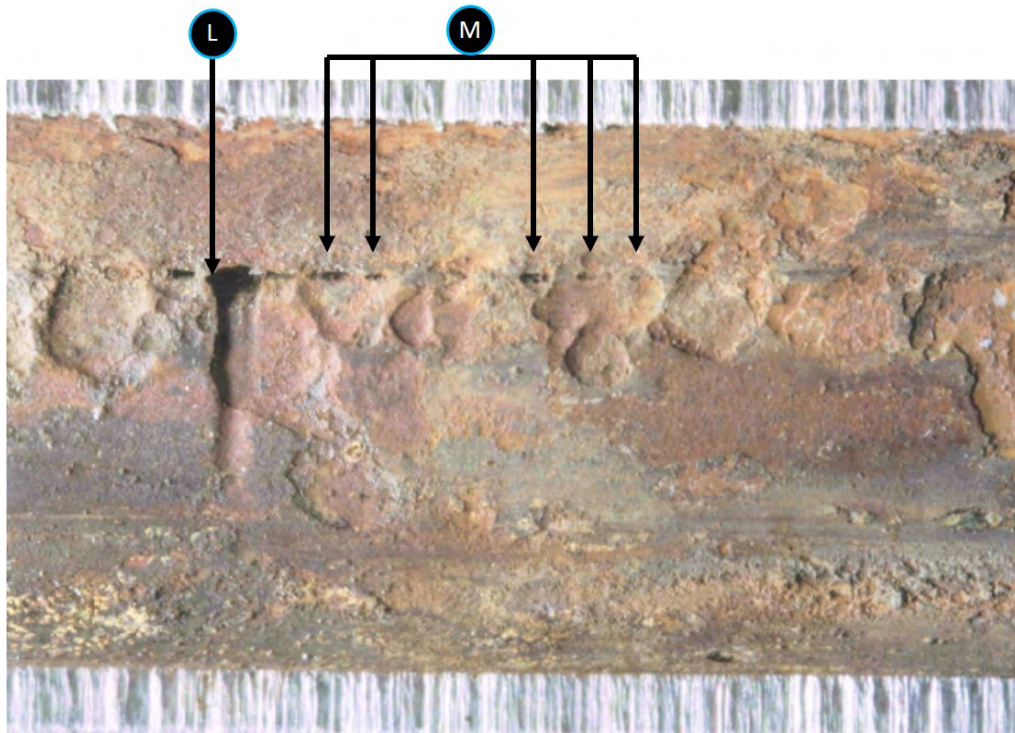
Interior view of brine tube R2T3 after it was cut horizontally. The breach hole (L) is aligned horizontally with other pits that have not corroded all the way through the brine tube (M). (Source: Forensic Engineering Report from Acuren Group Inc. — Appendix C)
